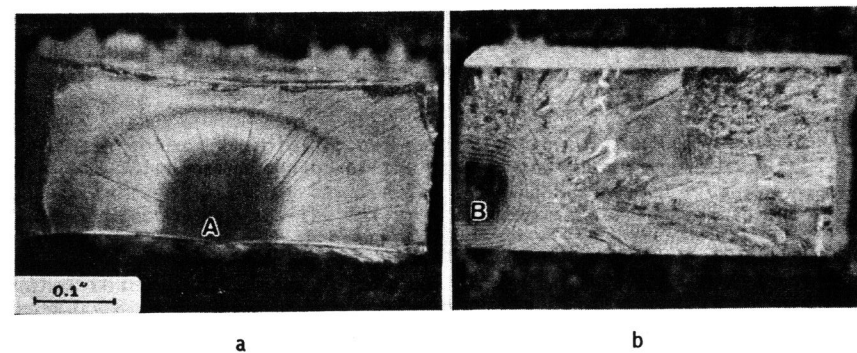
Fracture surface of 1/4" thick samples (a) Ductile and (b) Brittle.
